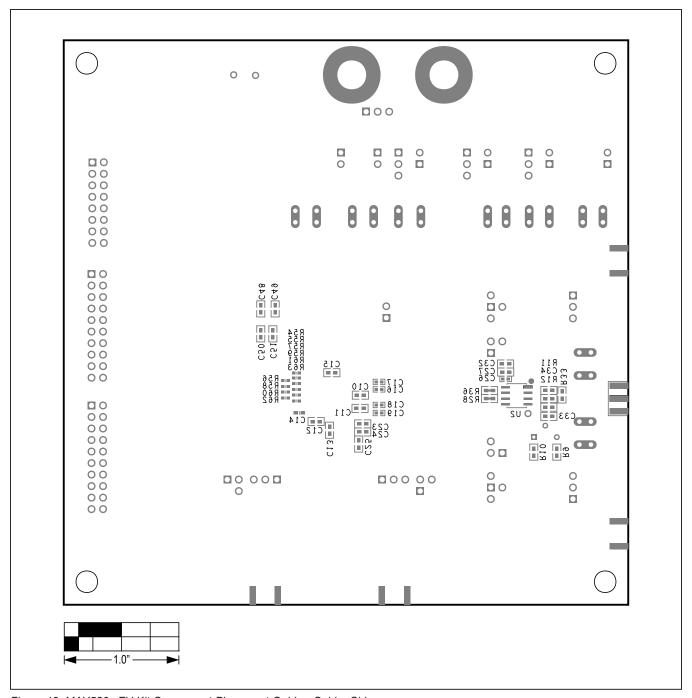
MAX586x EV Kit Component Placement Guide—Solder Side
